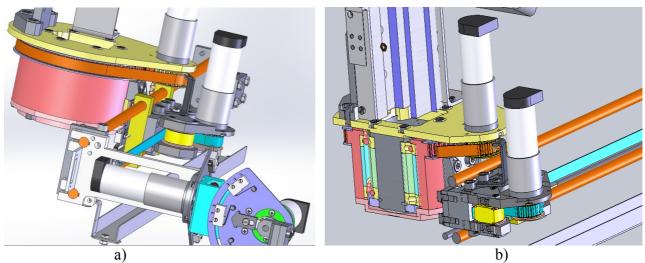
Design solution for orientation subansembly: a) CAD model of orientation subanssembly; b) Section view of orientation subanssembly
